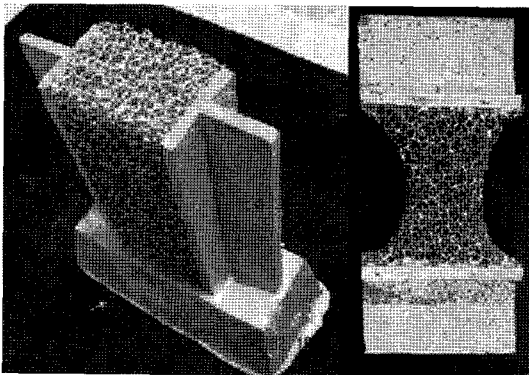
Plate attached aluminum foam(one piece) and tensile specimen obtained by sawing it.
